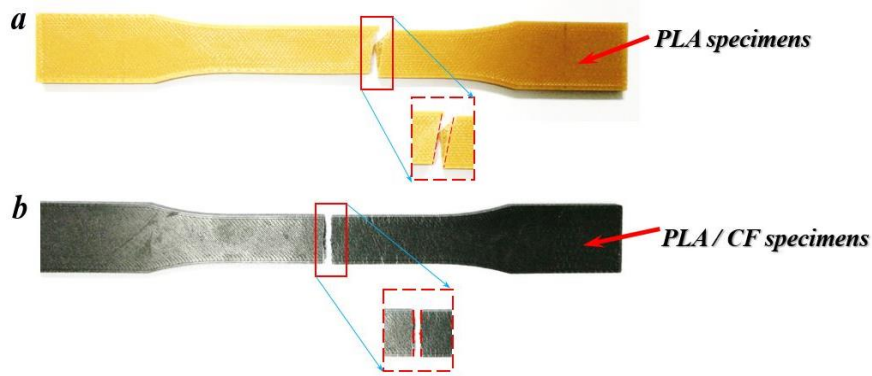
Damaged specimens under tensile test: (a) PLA specimen and (b) PLA/CF specimen
